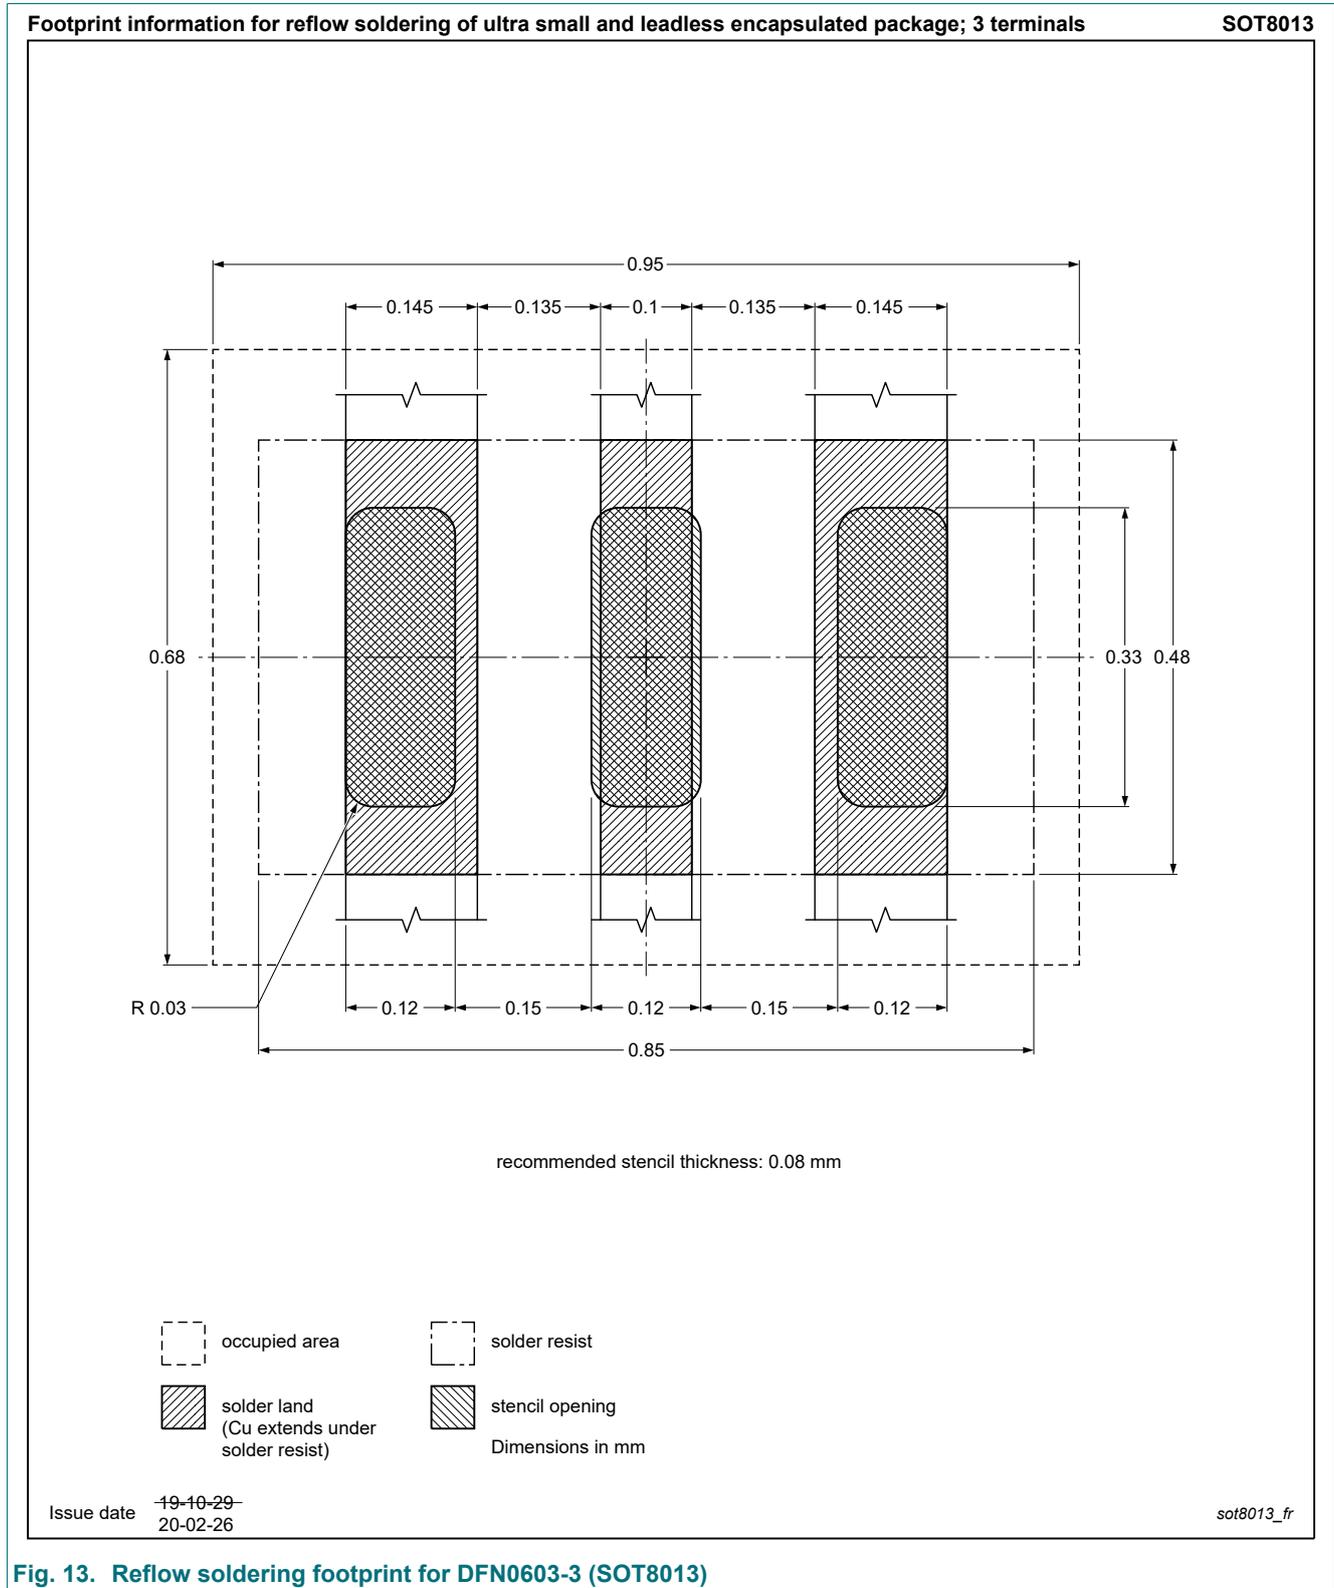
Reflow soldering footprint for DFN0603-3 (SOT8013)
